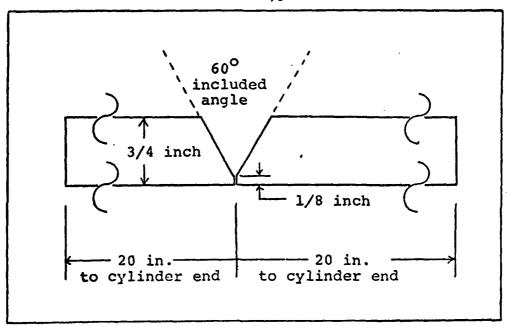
WELD JOINT GEOMETRY FOR THE BUTT WELDING OF THE TWO CYLINDERS
